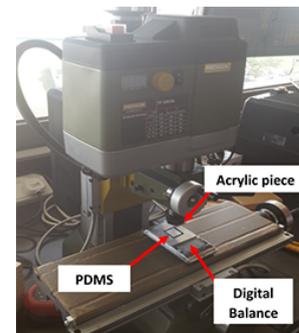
A CNC milling machine for measuring the normal force of the PDMS
